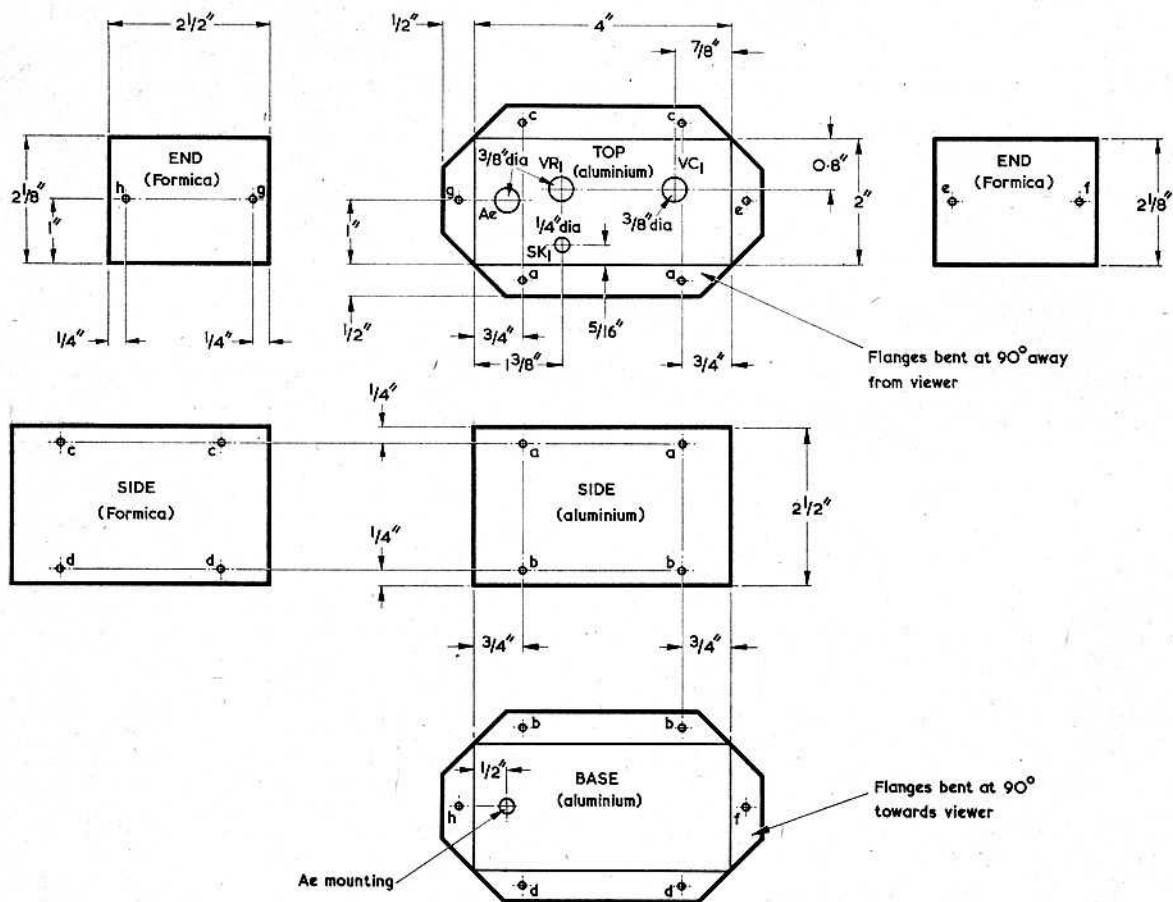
Details of the parts which make up the case. The panels are aluminium sheet or Formica, as indicated
